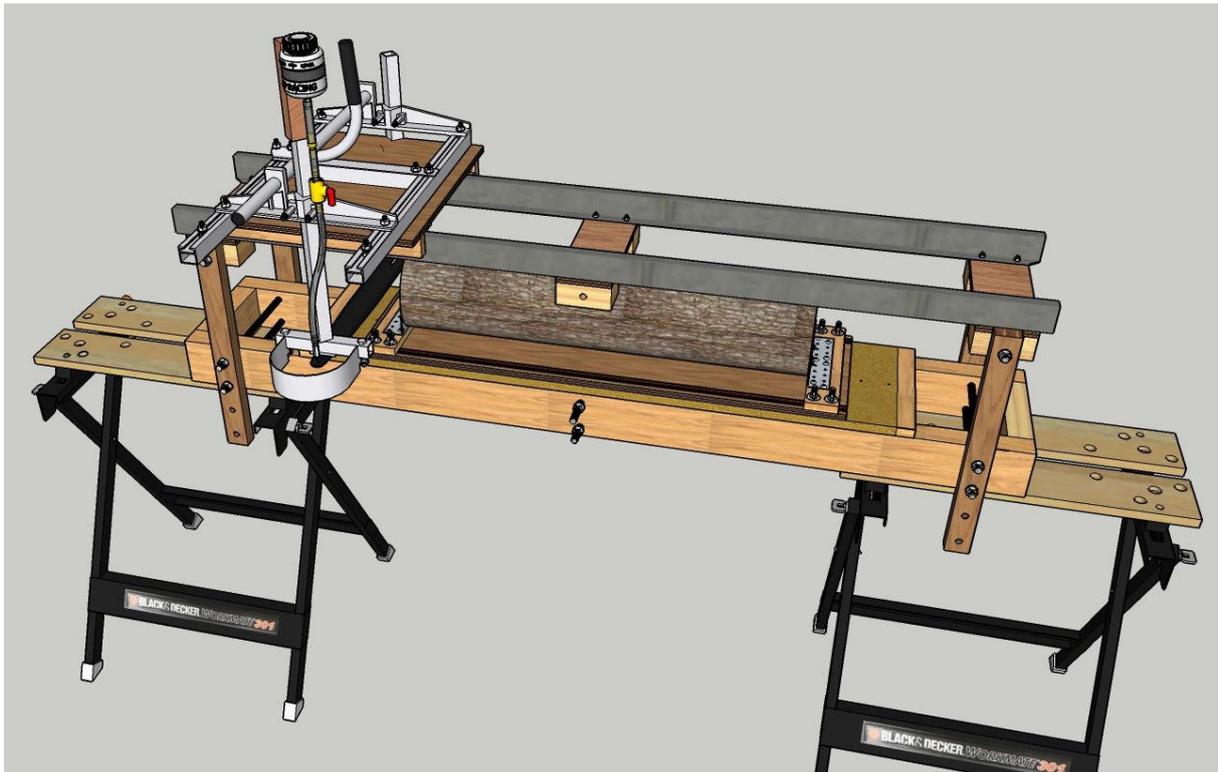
CAD drawing of the jig designed to support the saw, mill and wood in use. The chainsaw plus mill is mounted on a carriage which uses furniture castors to run along two steel rails. An important feature is an auxiliary oiler to deliver chainsaw oil to the guide bar during operation. This is essential to ensure that the chain plus bar don't overheat in use.
